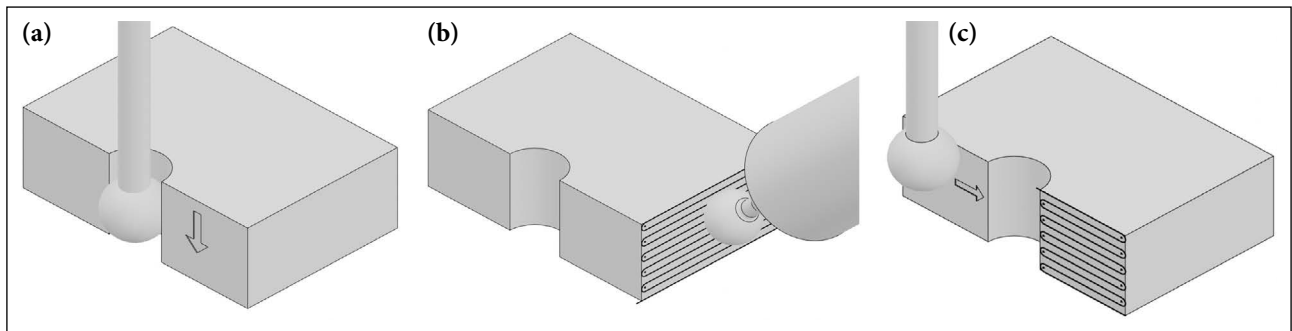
Schematic representation of operations by illustrating 3D models of the tool and workpiece. Accordingly, Operations a, b, and c represents the cases of drilling, surface grinding with 45° tool angle, and a lateral surface grinding, respectively.
